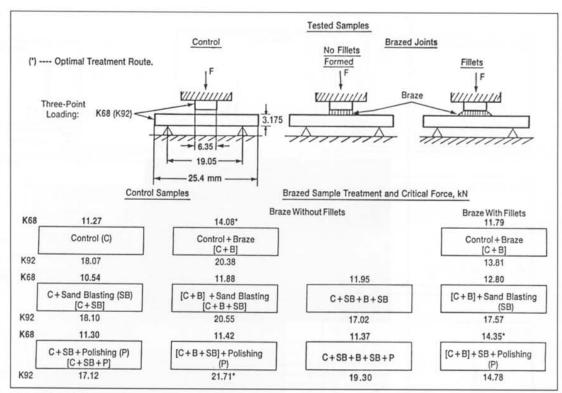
Critical fracture force of K68 and K92 joints brazed with METGLAS MBF-1011 brazing filler metal.
